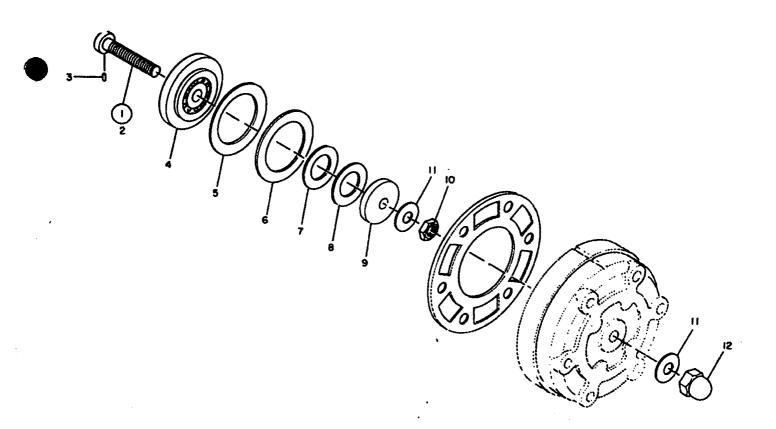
42 GA CONCENTRIC RING VALVE ASSEMBLY
